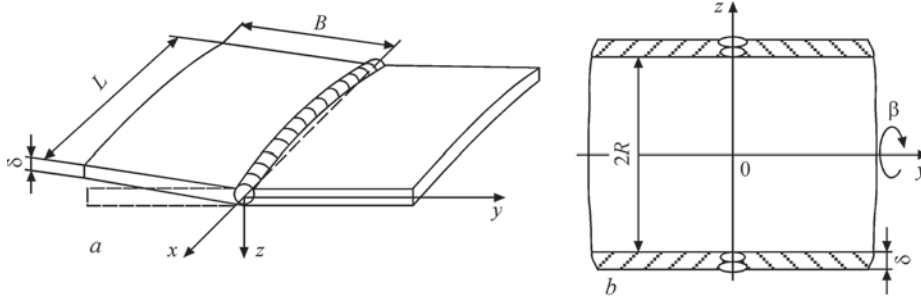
Determination of inherent strain function parameters: *a* — 3D model of a butt welded joint of limited size plates; *b* — 2D model of a circumferential welded joint
